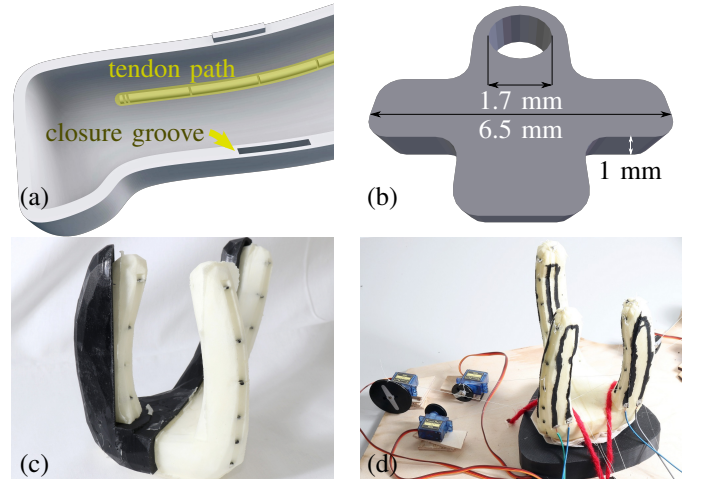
Mould design showing tendon path with cylindrical inset and gaps where pins are held in place, as well as mould closure aids (a); pin geometry (b); fabricated part with pins in place (c); actuated soft gripper (d).
